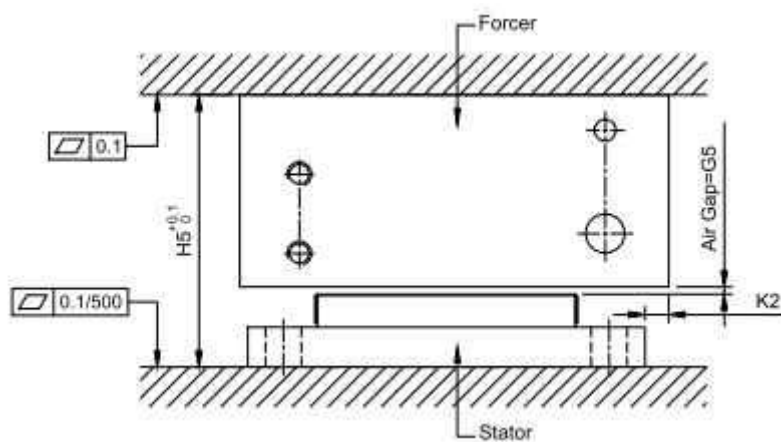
LMSS iron core linear motor assembly
